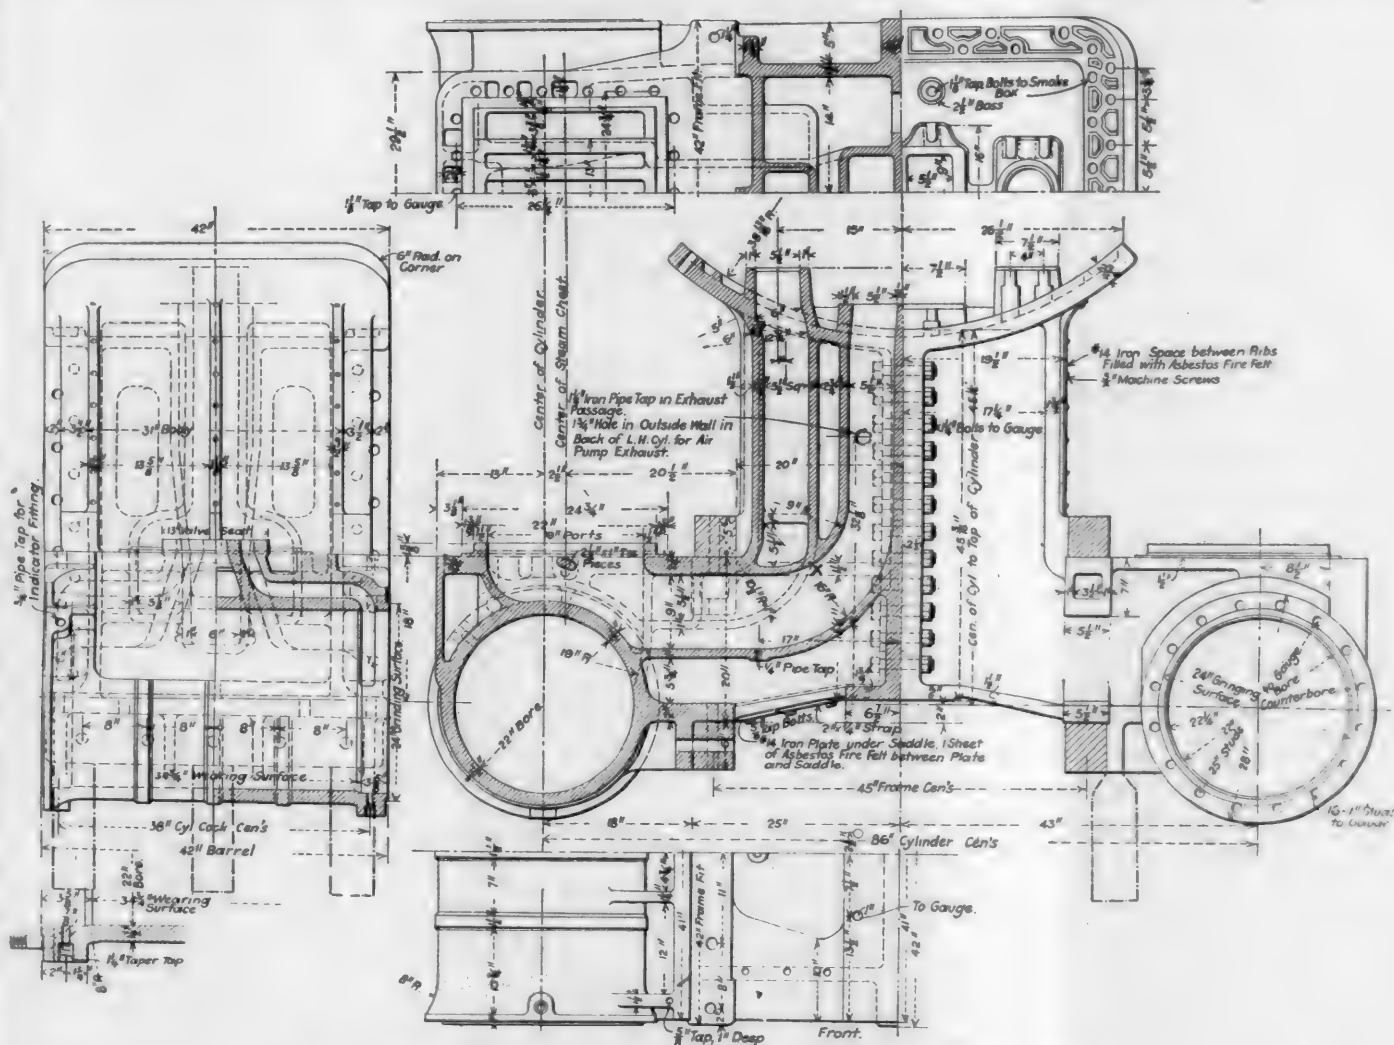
22 BY 32 IN. SLIDE VALVE CYLINDER FOR CONSOLIDATION LOCOMOTIVE.
